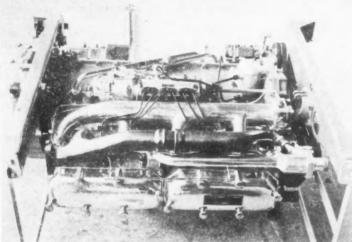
(Top) Left side view of Leyland flat Diesel engine showing the arrangement of accessories and the long oil filler pipe.
